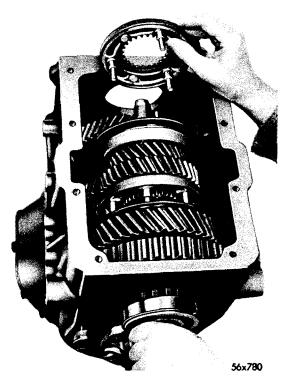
Removing 4th - 5th Speed Synchronizer Stop Rings
